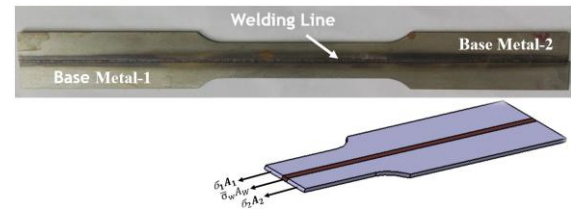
The cross section of base metals and weld zone in the tensile test sample from laser tailor-welded blanks
